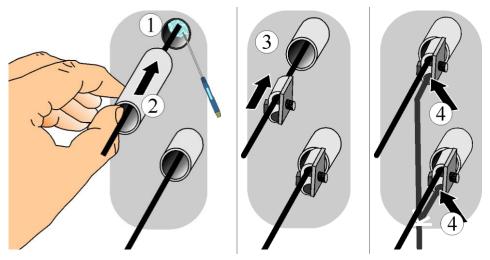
Seal and insert the ceramic feedthrough tube (similar to picture)
